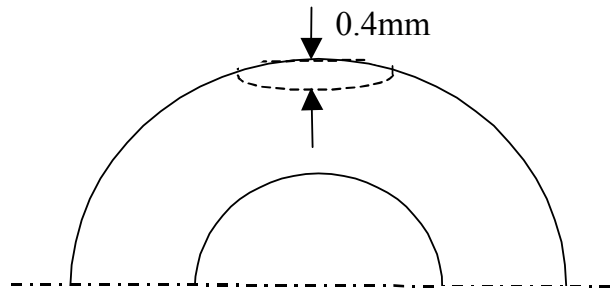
Schematics of the machined groove simulating a crack along circumference of the cylinder.
